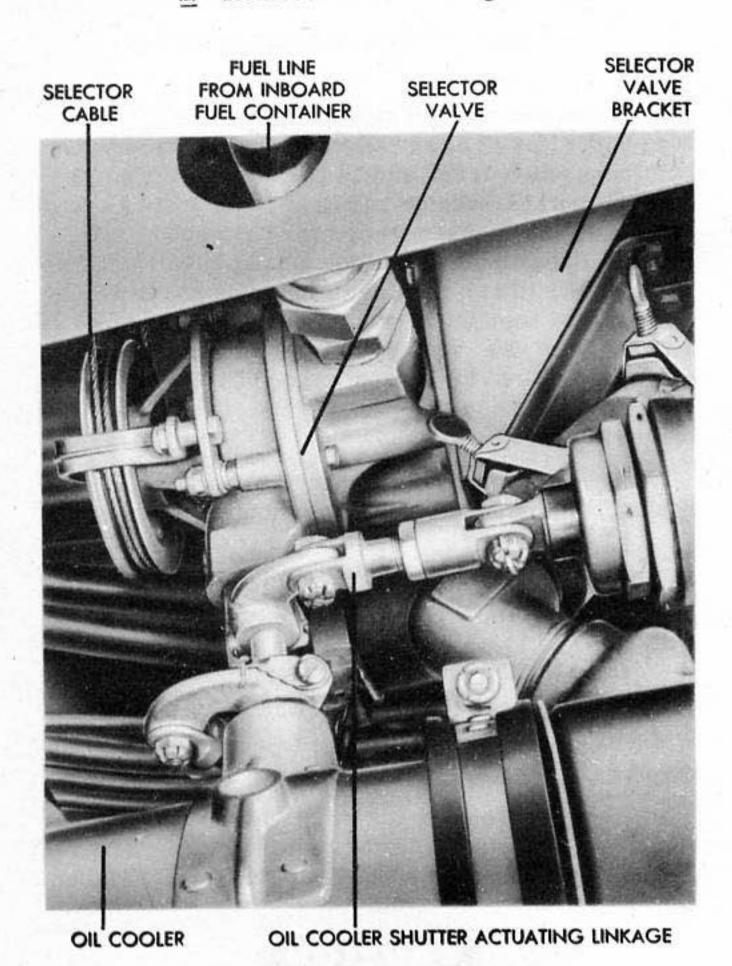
INSTALLED FUEL TANK SELECTOR VALVE
